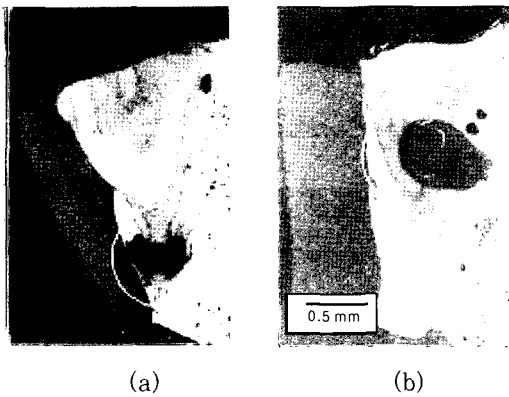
Inner cavities in cross section of weld, a) in bottom of weld, b) near the sintered tip
